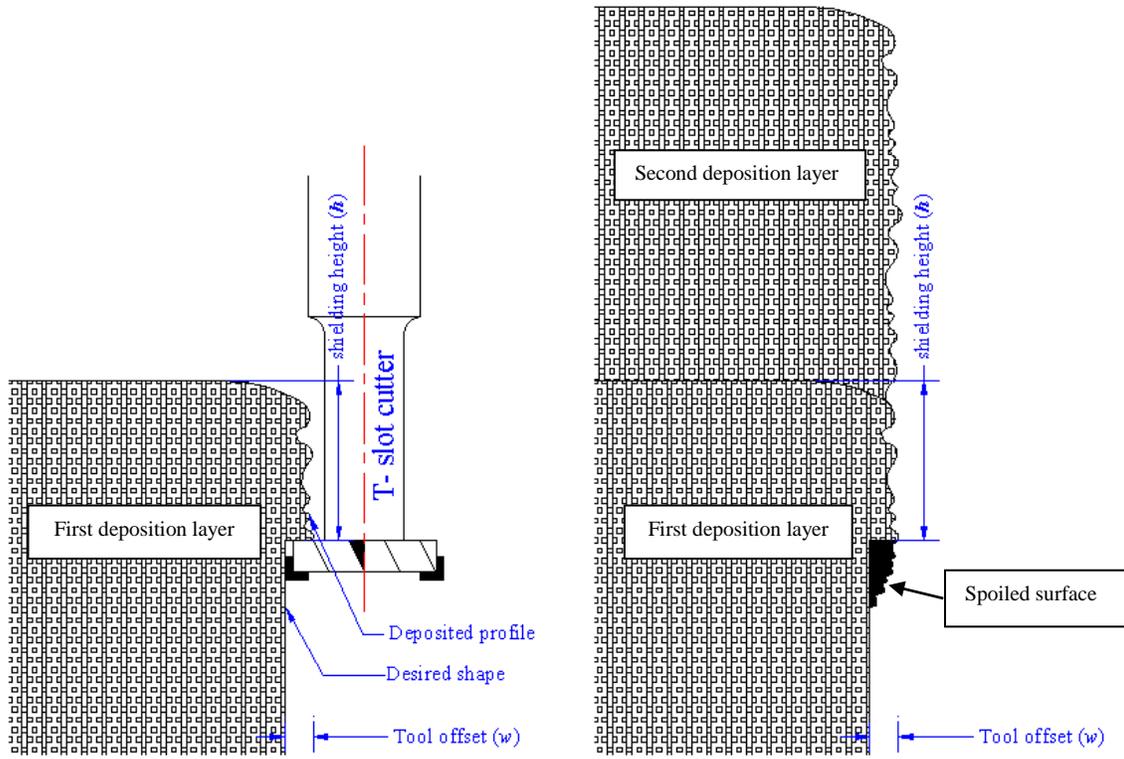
undercut milling machining to reduce spreading of molten pool at the following deposition process
